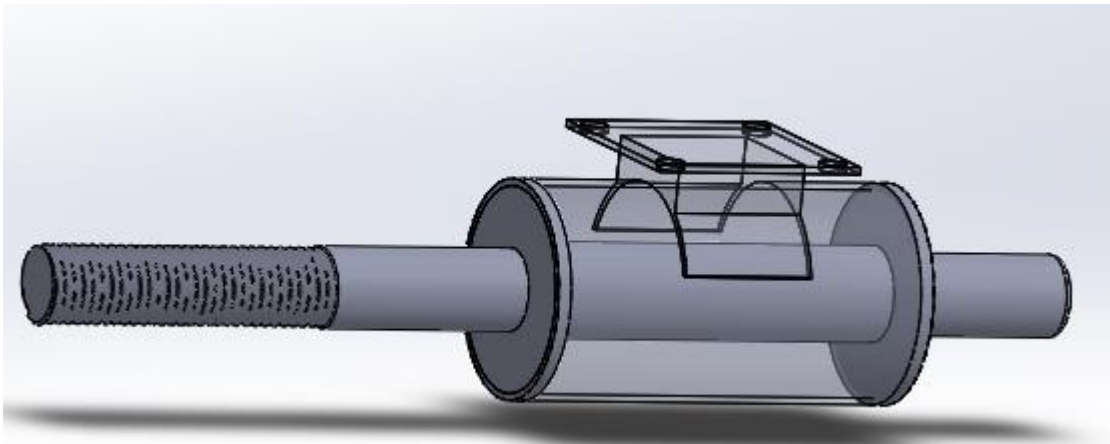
Assembly 3D drawing of designed solenoid using SOLIDWORKS 2018
